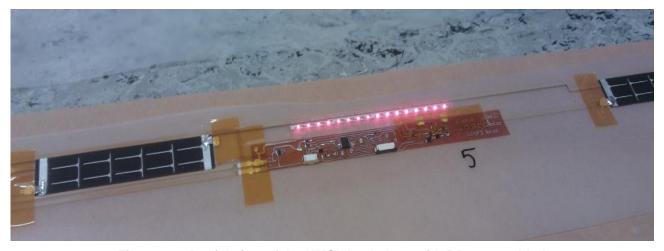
Partial view of the HMSL backplane with BBs assembled
